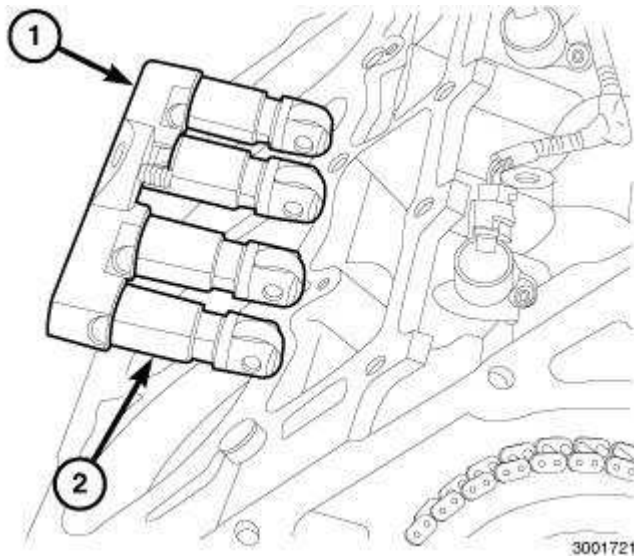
Hydraulic Lifters/Tappets & Retainer/Guide Holder
